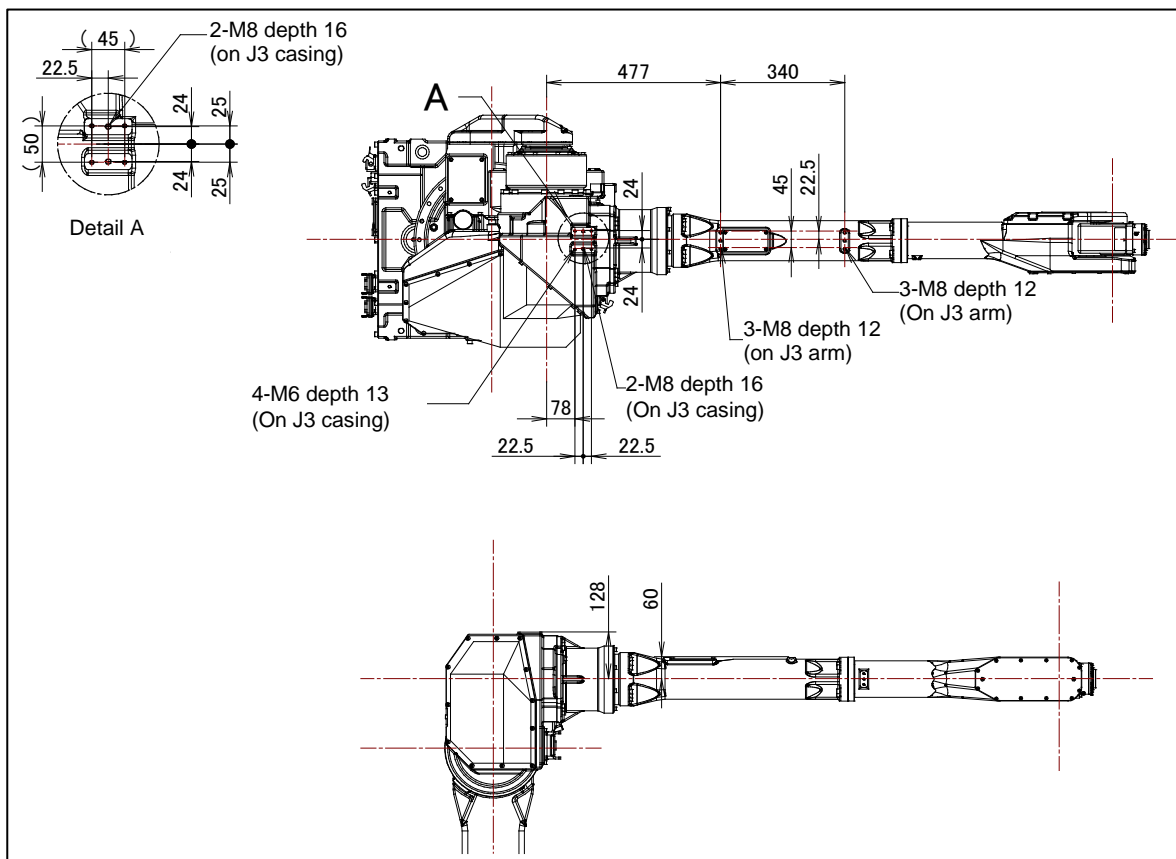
(c) Equipment mounting surfaces (M-710iC/20M)
